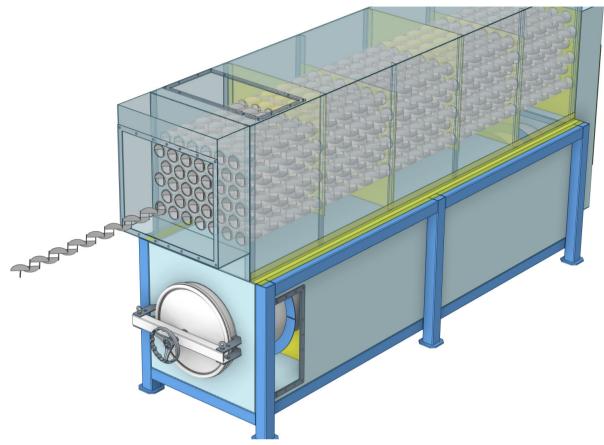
Turbulators are made by cutting and bending 1 mm thick metal sheets.
